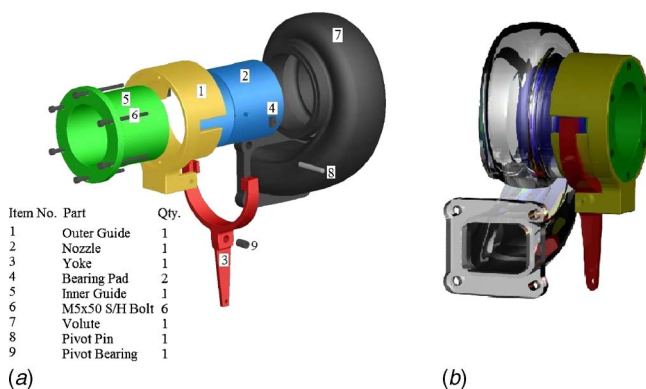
(a) Active control turbocharger exploded view and (b) assembled turbocharger
